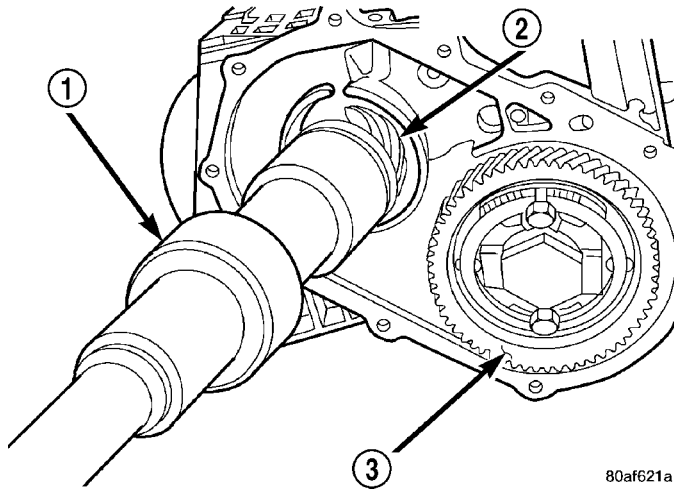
Remove Transfer Shaft Bearing Snap Ring
